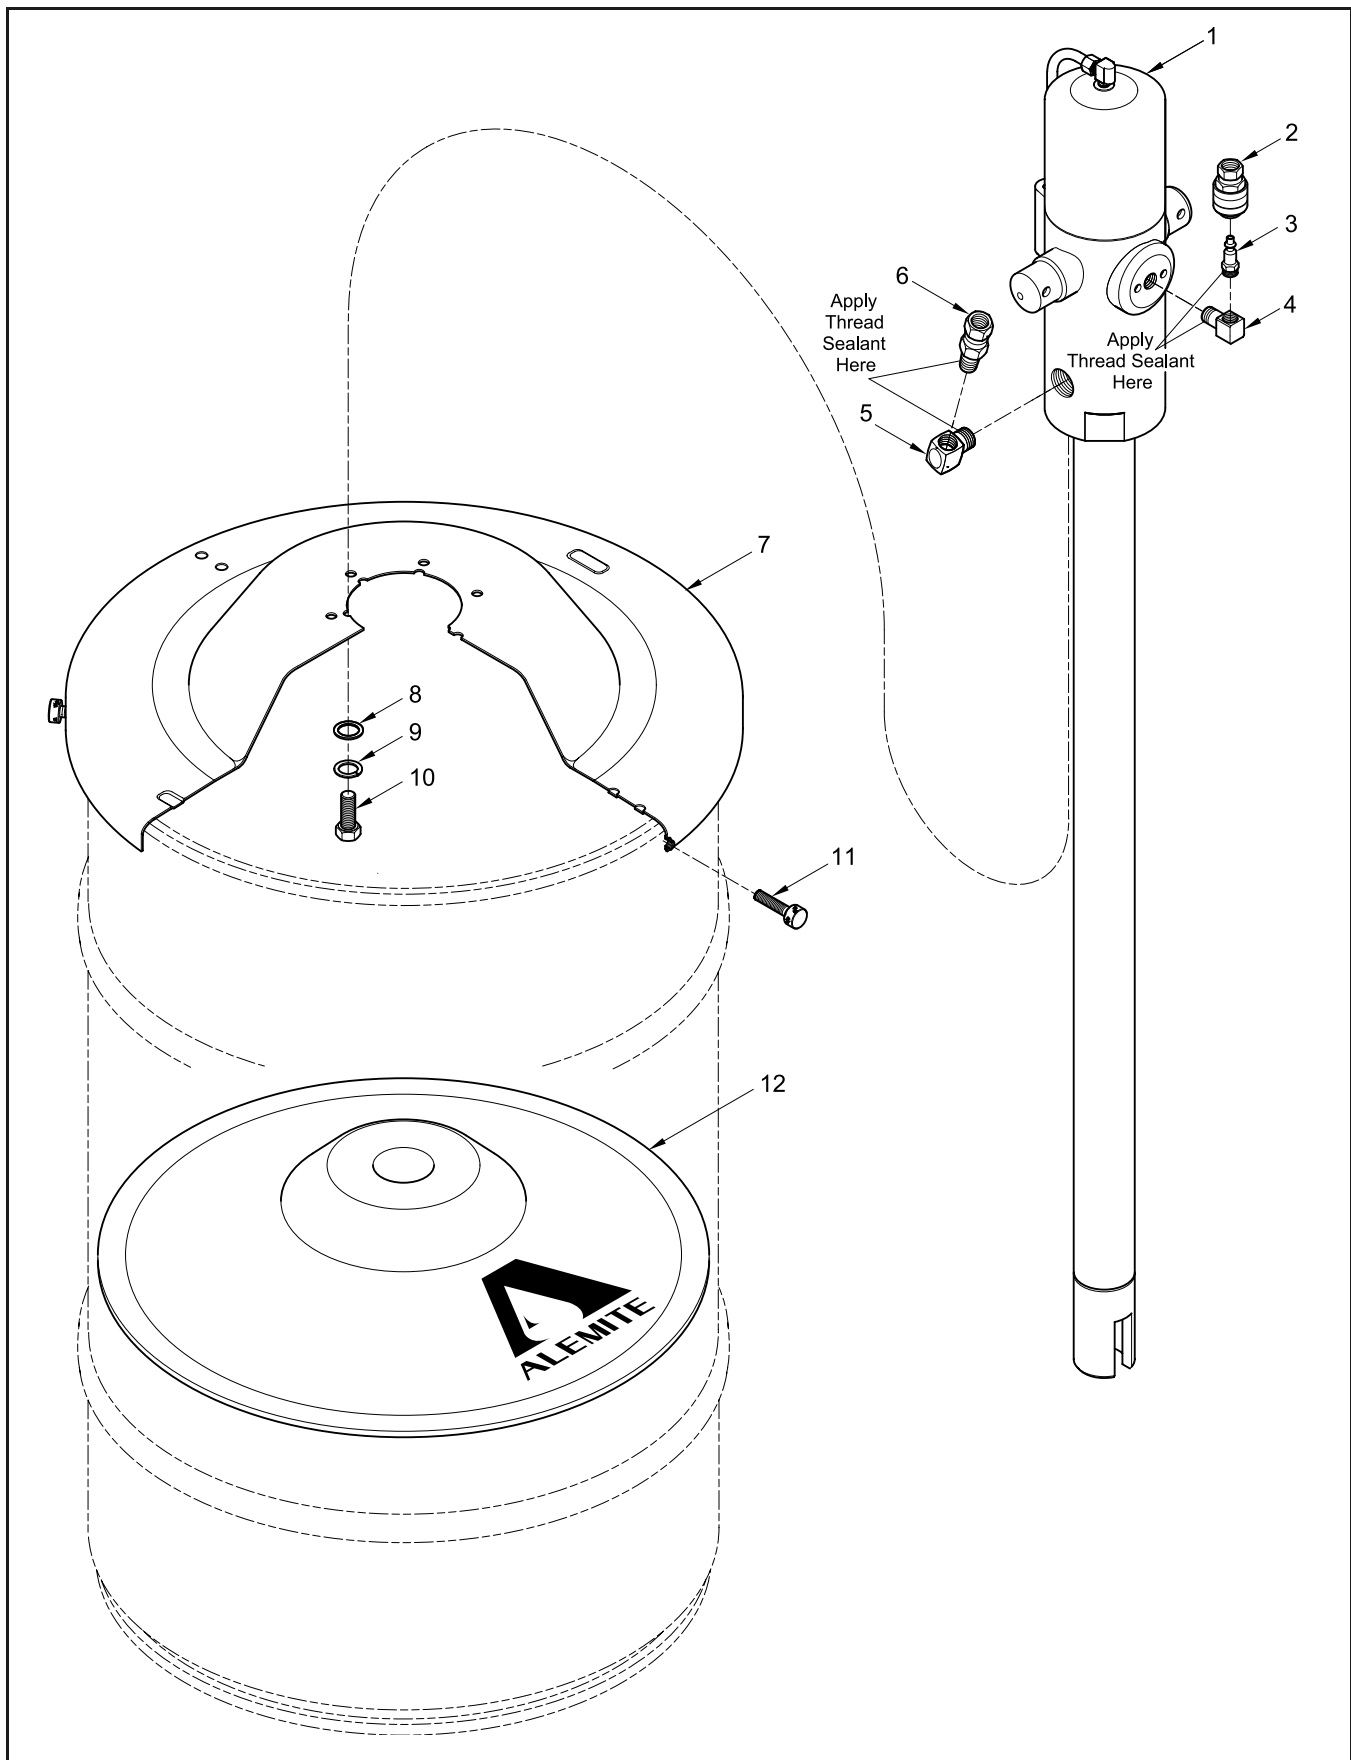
High-Pressure Grease Pump Model 8550-A1 - Exploded View
